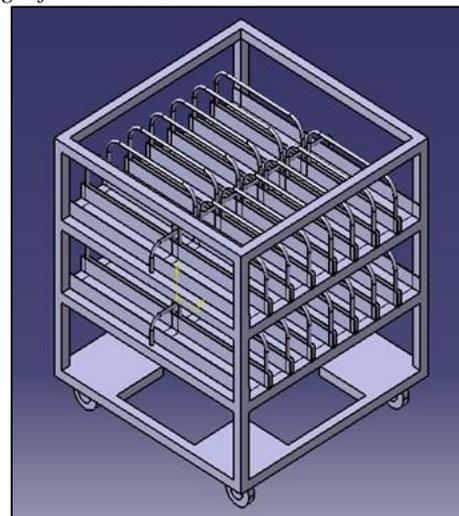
CAD Model of Trolley for Oil Lube Cooler
